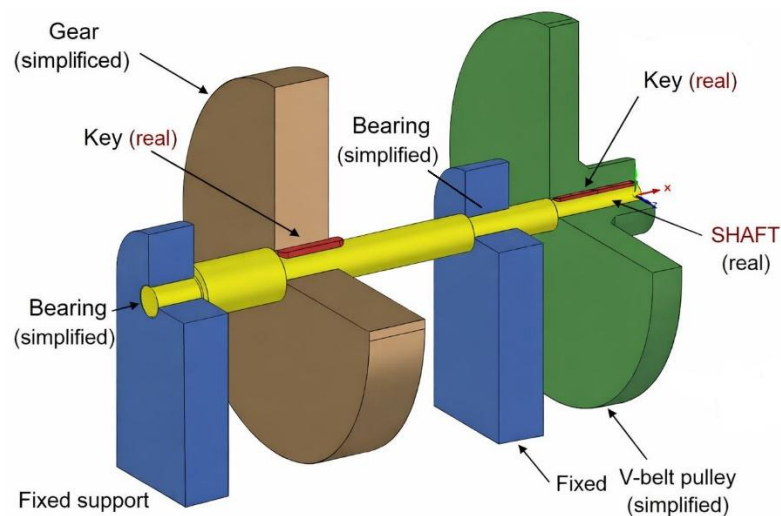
Simplified shaft assembly used in the FEA Numerical Simulation Challenge, highlighting the shaft, gear, V-belt pulley, bearings, and real keys.
